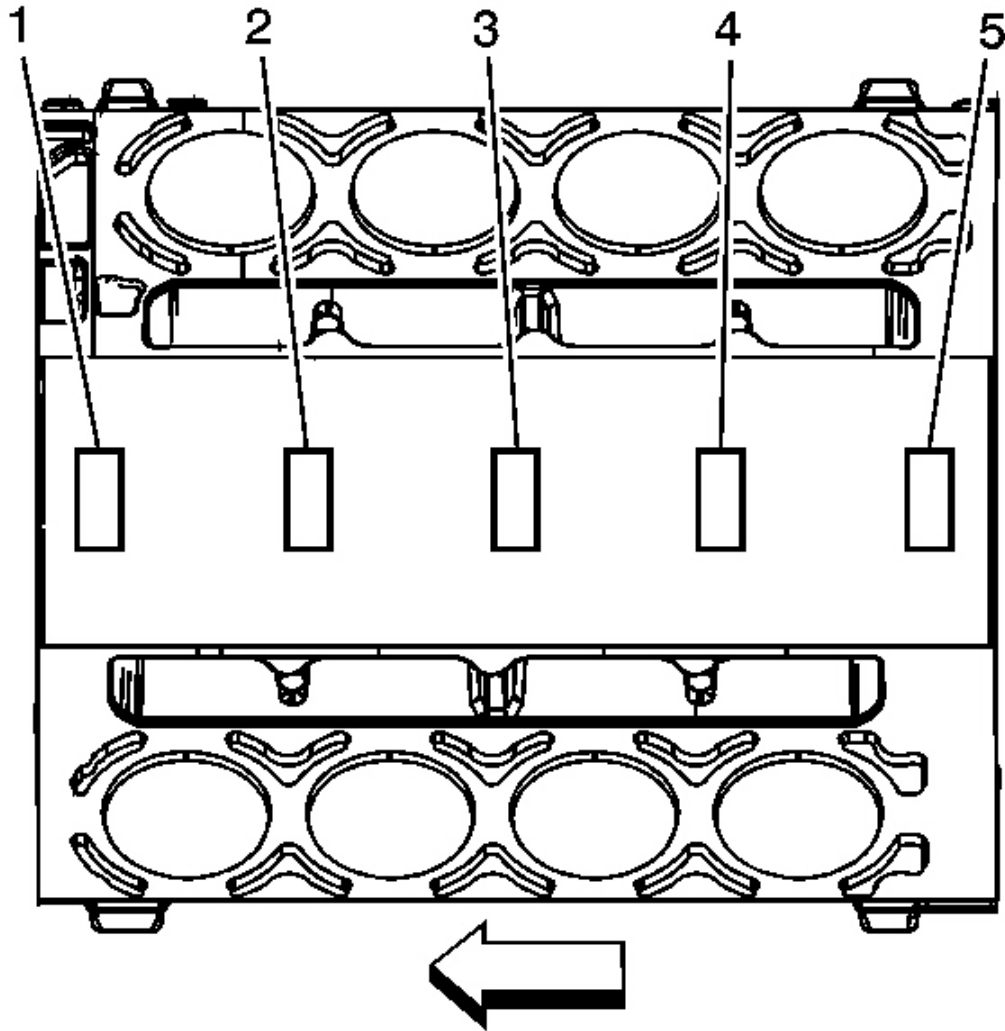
Identifying Engine Block Camshaft Bearing Bores
